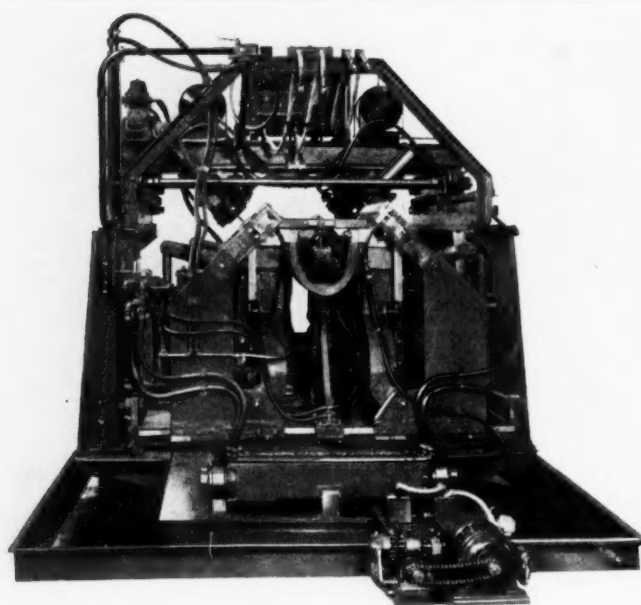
End View of Duplex Type Machine Shown in Fig. 7
